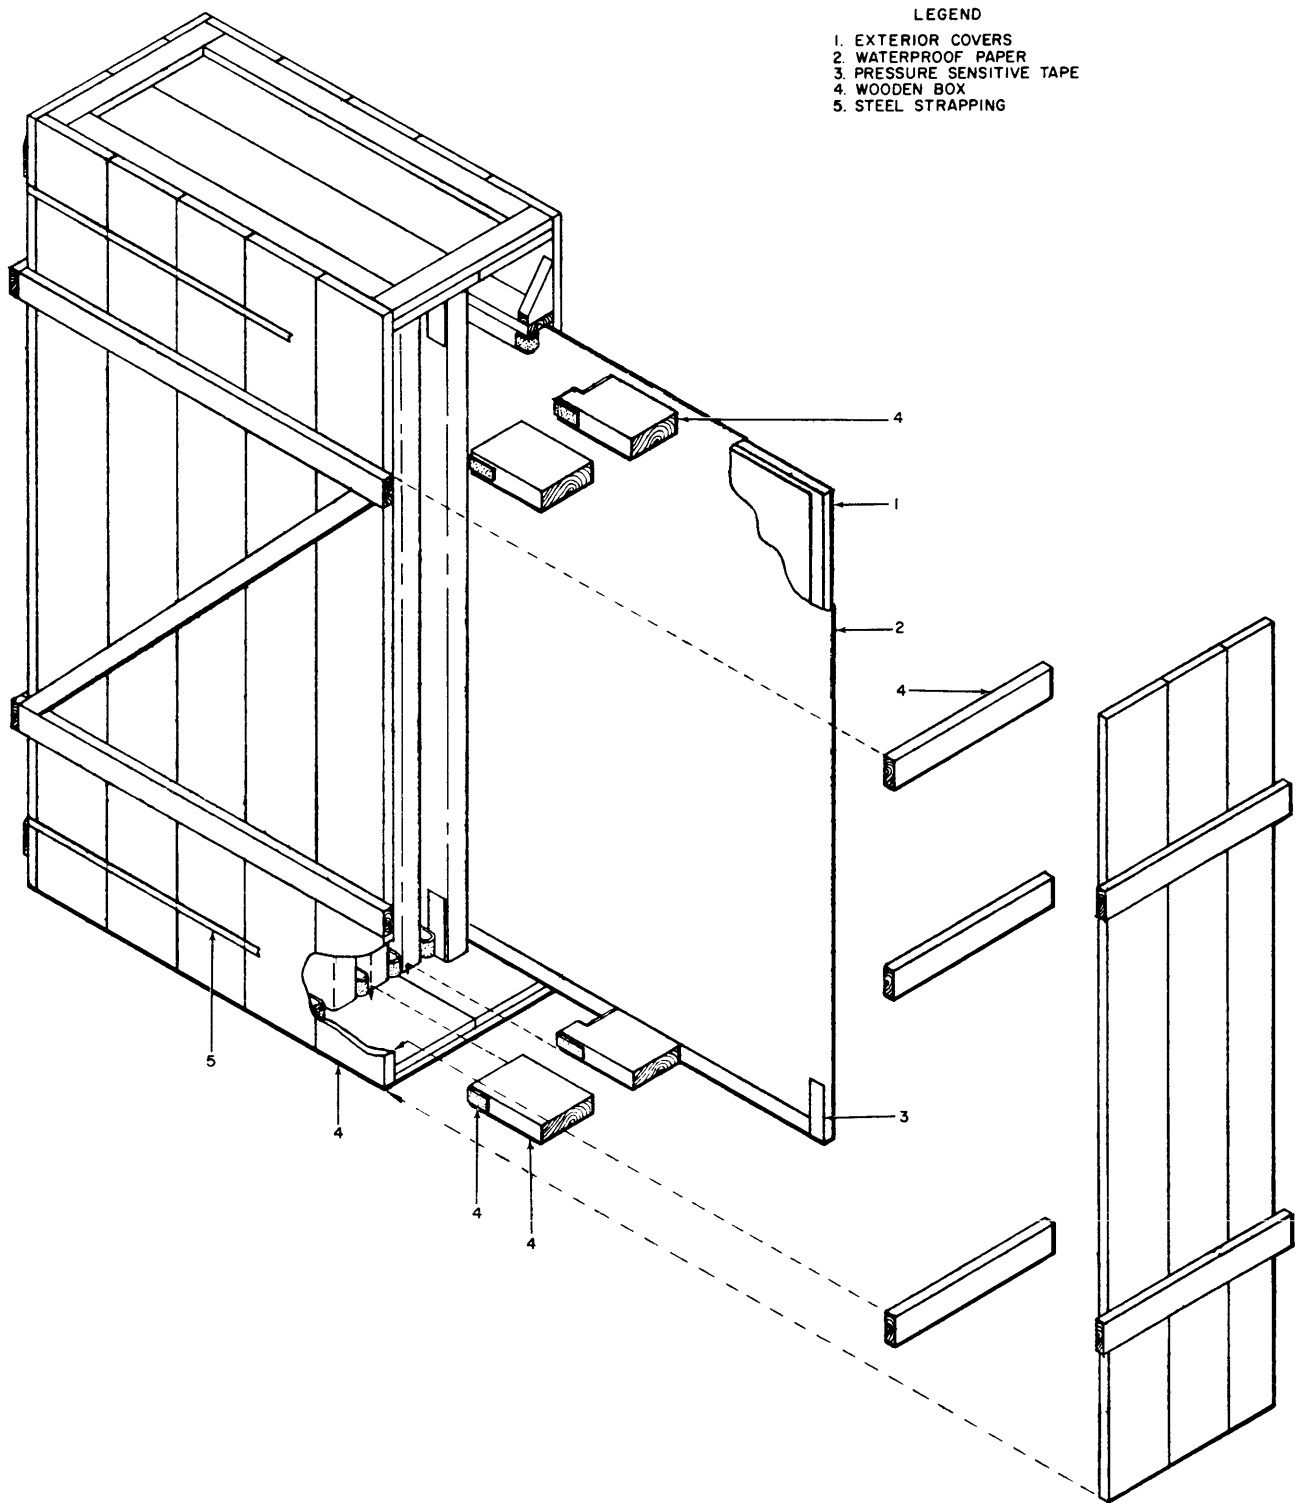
Typical Equipment Packaging (Sheet 2 of 4).
